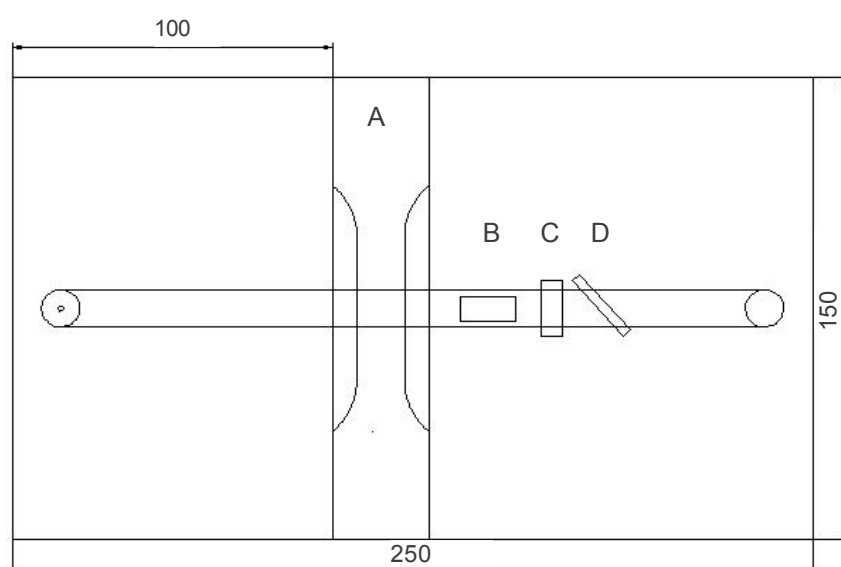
FSW weld; (A: tensile specimen, B: longitudinal macroscopic specimen, C: transversal macroscopic specimen, D: diagonal macroscopic specimen)
